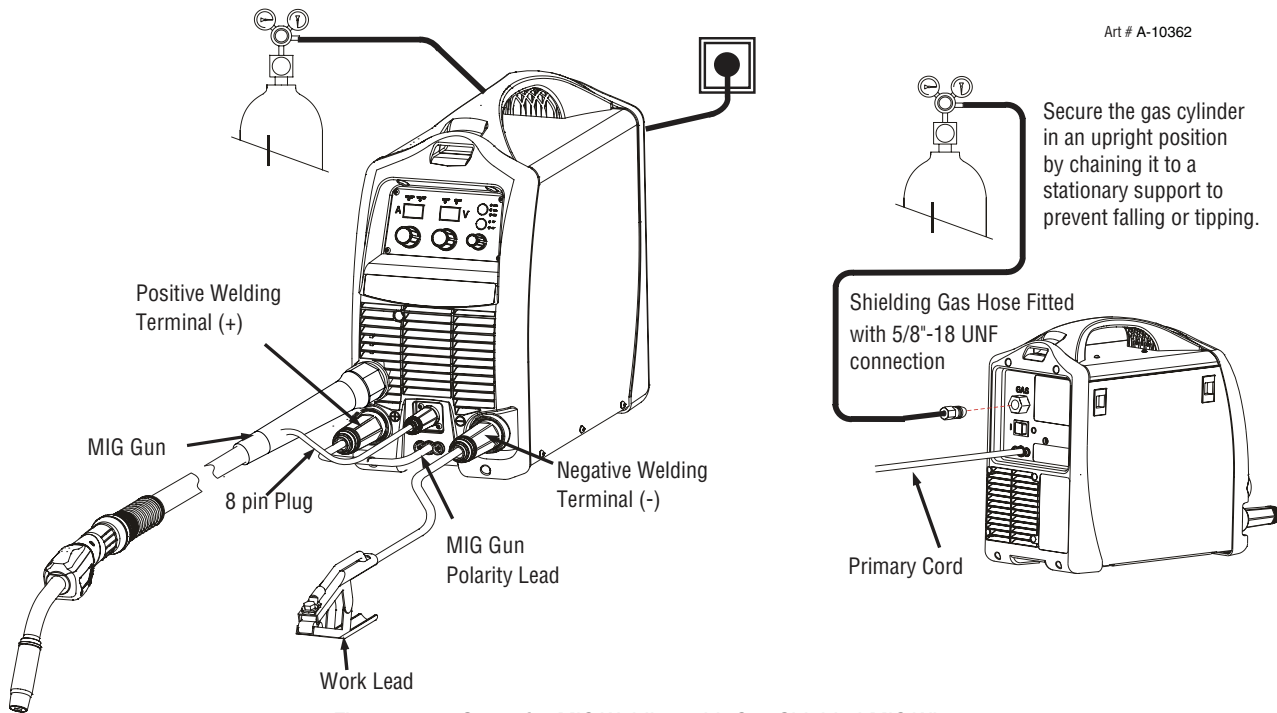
Setup for MIG Welding with Gas Shielded MIG Wire
